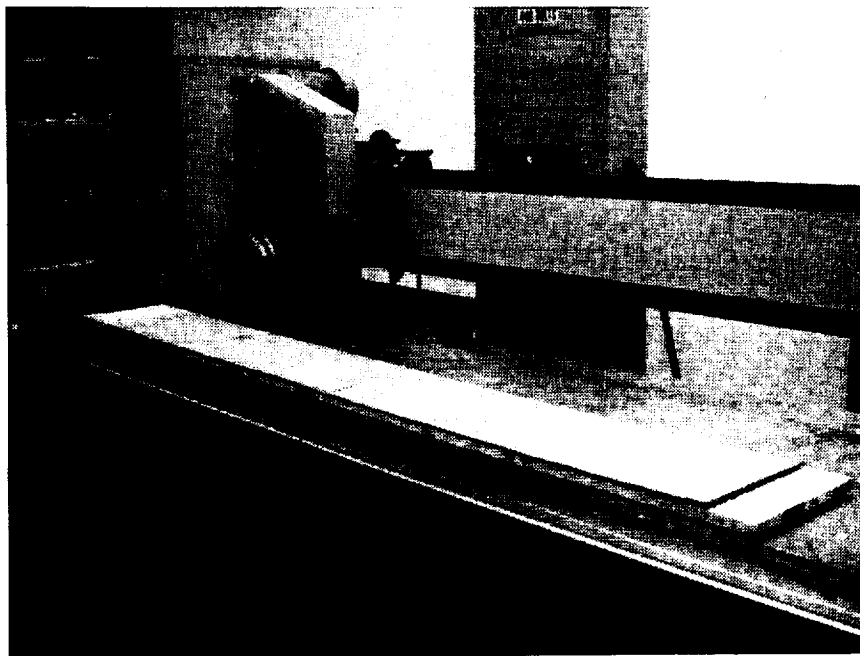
Full-Scale Con Clad Panel Ready for Machining (129432B)
